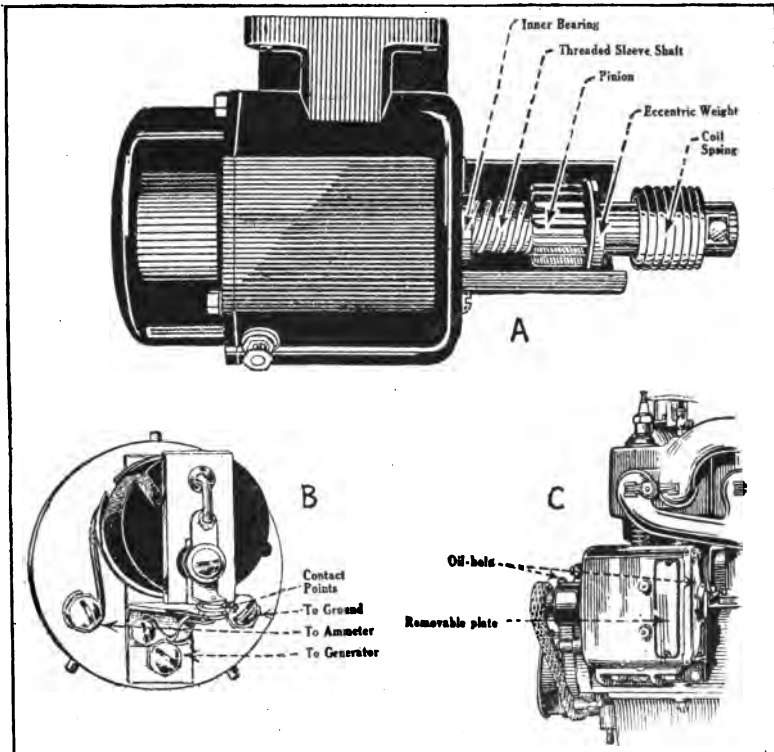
Starting Motor Used in 1916 Auto-Lite-Overland System with Automatic Pinion Shift as A. Automatic Cutout Shown at B. Method of Driving Generator with Silent Chain Outlined at C.
